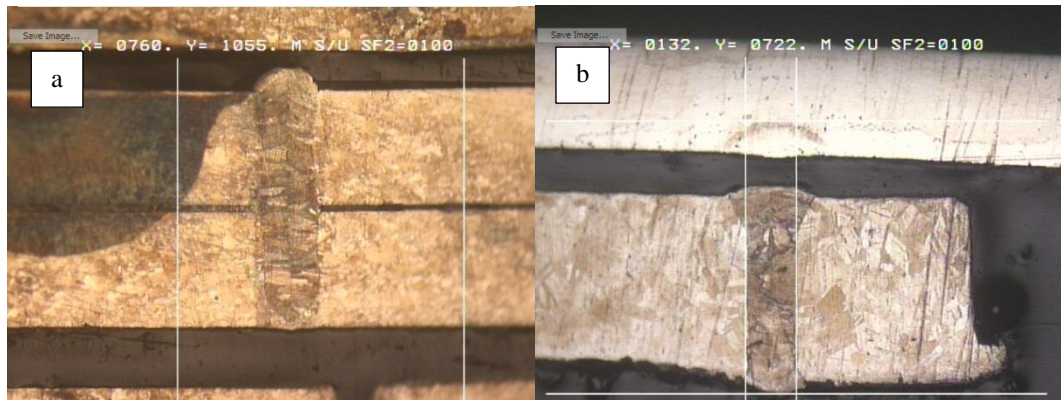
Example of weld defects that can prevent proper device function. (a) Weld crown that would prevent proper fit-up of the next layer given current MPT designs. (b) Failed weld due to a large gap.
